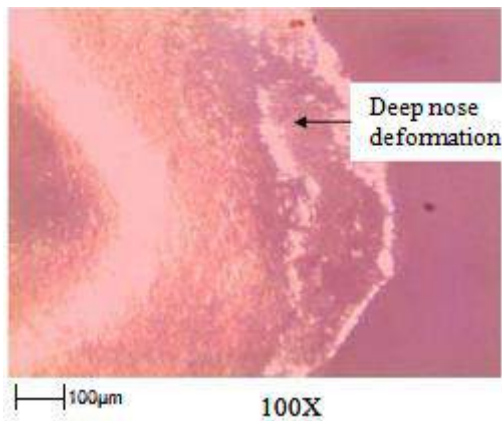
Carbide insert after machining at cutting speed of 240 m/min
